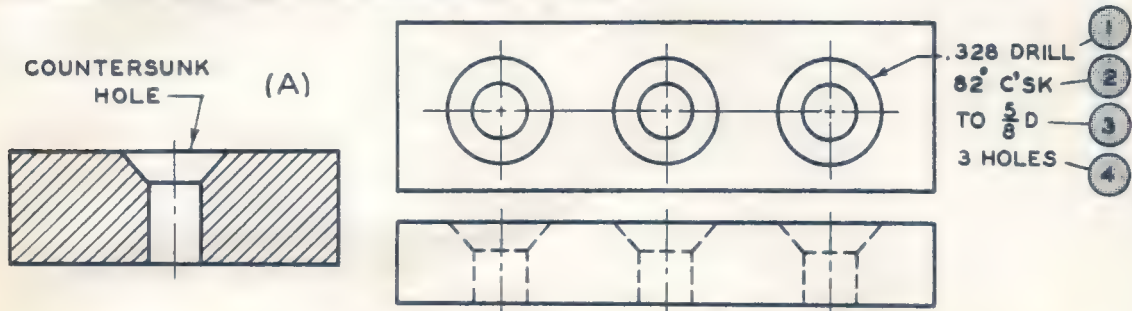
DIMENSIONING COUNTERSUNK HOLES
